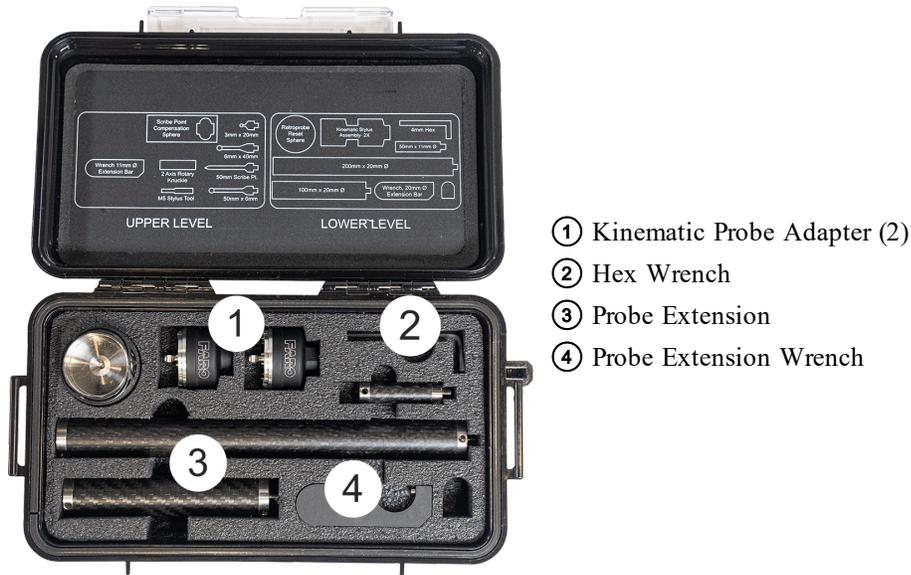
6Probe Probe Tip Case - Bottom Level
